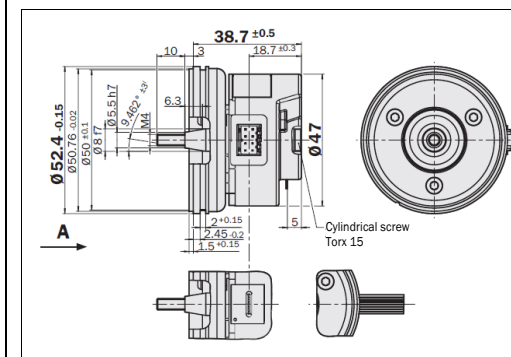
Dimensional drawing of SRS50S/SRM50S, conical shaft, resolver support
